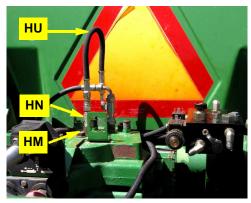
ii: Power Beyond. Run-tee and hose installed between T and existing LS run-tee
